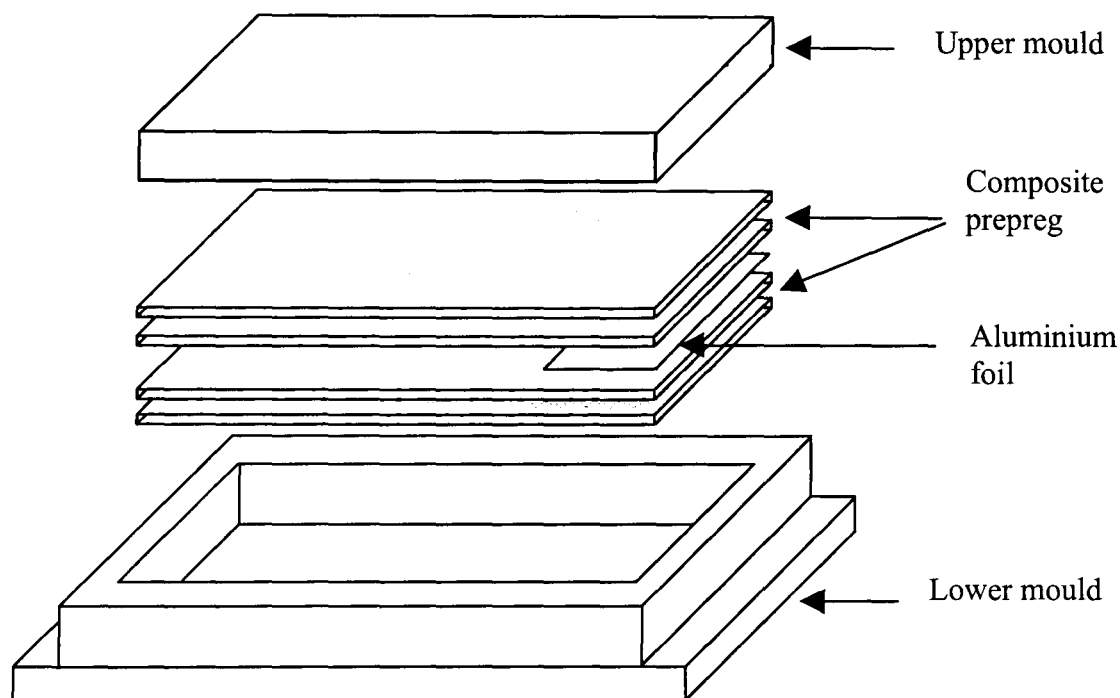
The stacking arrangement of the composite and the starter defect in the picture frame mould .
